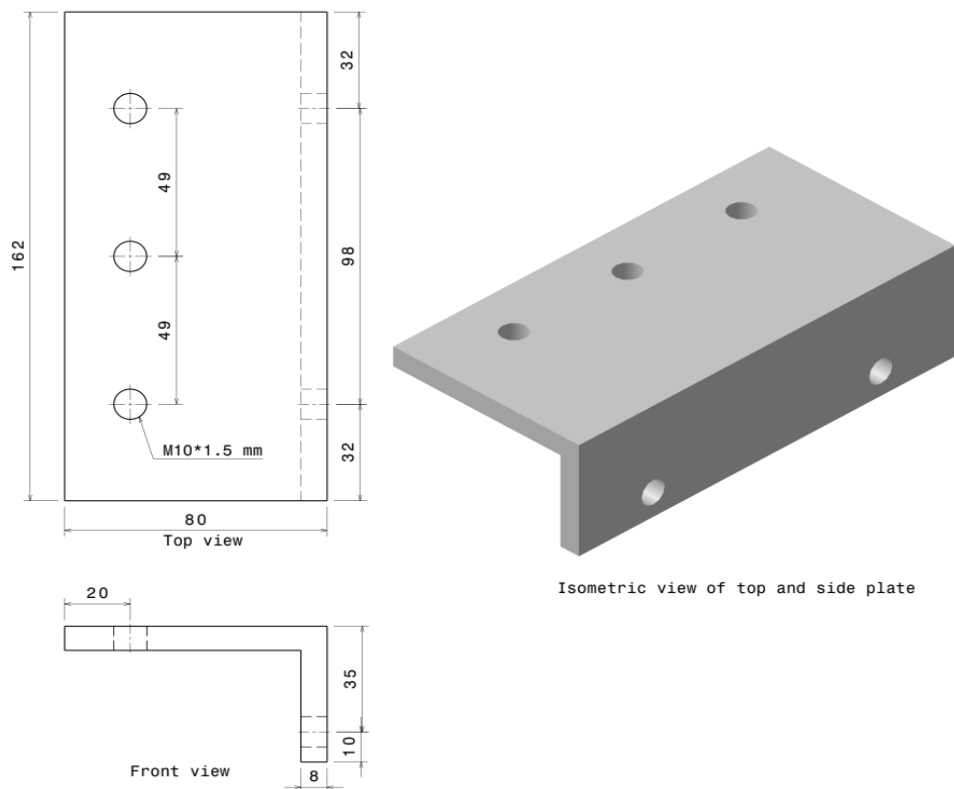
4: Dimensions of clamp (left side) & 3D model of Top plate/ clamp (right side)
